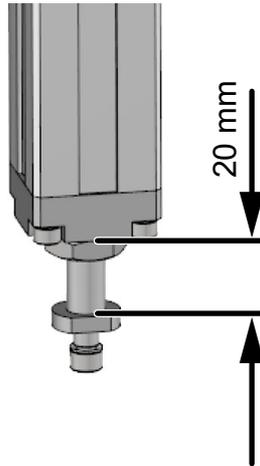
Screwing out the adjustment sleeves (illustration as an example)
